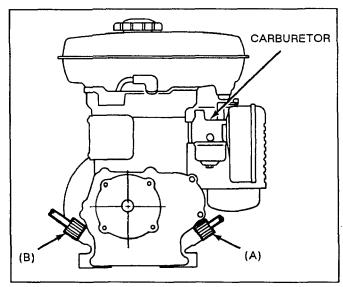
(A) Sensor probe mounted on carburetor side of engine. (B) Sensor probe mounted opposite carburetor side of engine.
